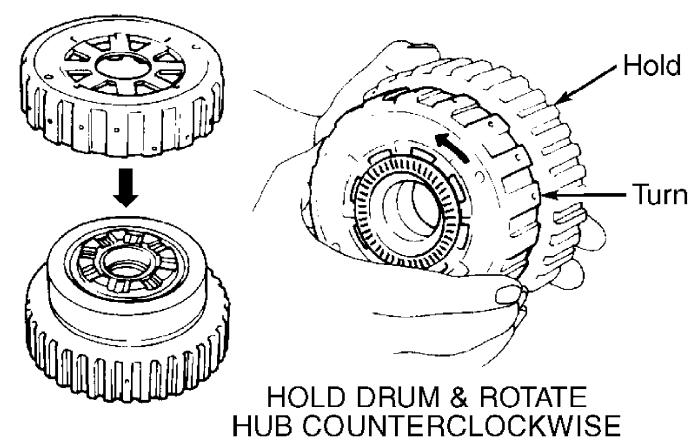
Installing Forward Clutch Drum Courtesy of Nissan Motor Co., U.S.A.
